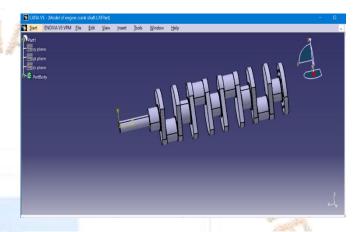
3D Model Of An Automotive Engine Crankshaft
